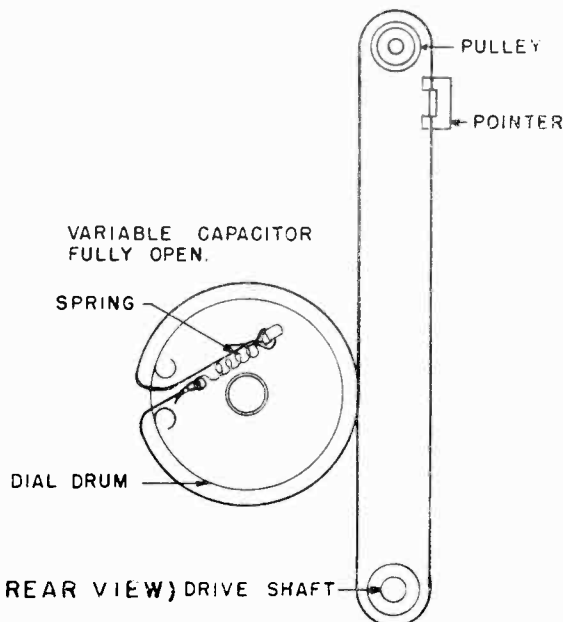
DIAL CORD DRIVE (REAR VIEW) DRIVE SHAFT
